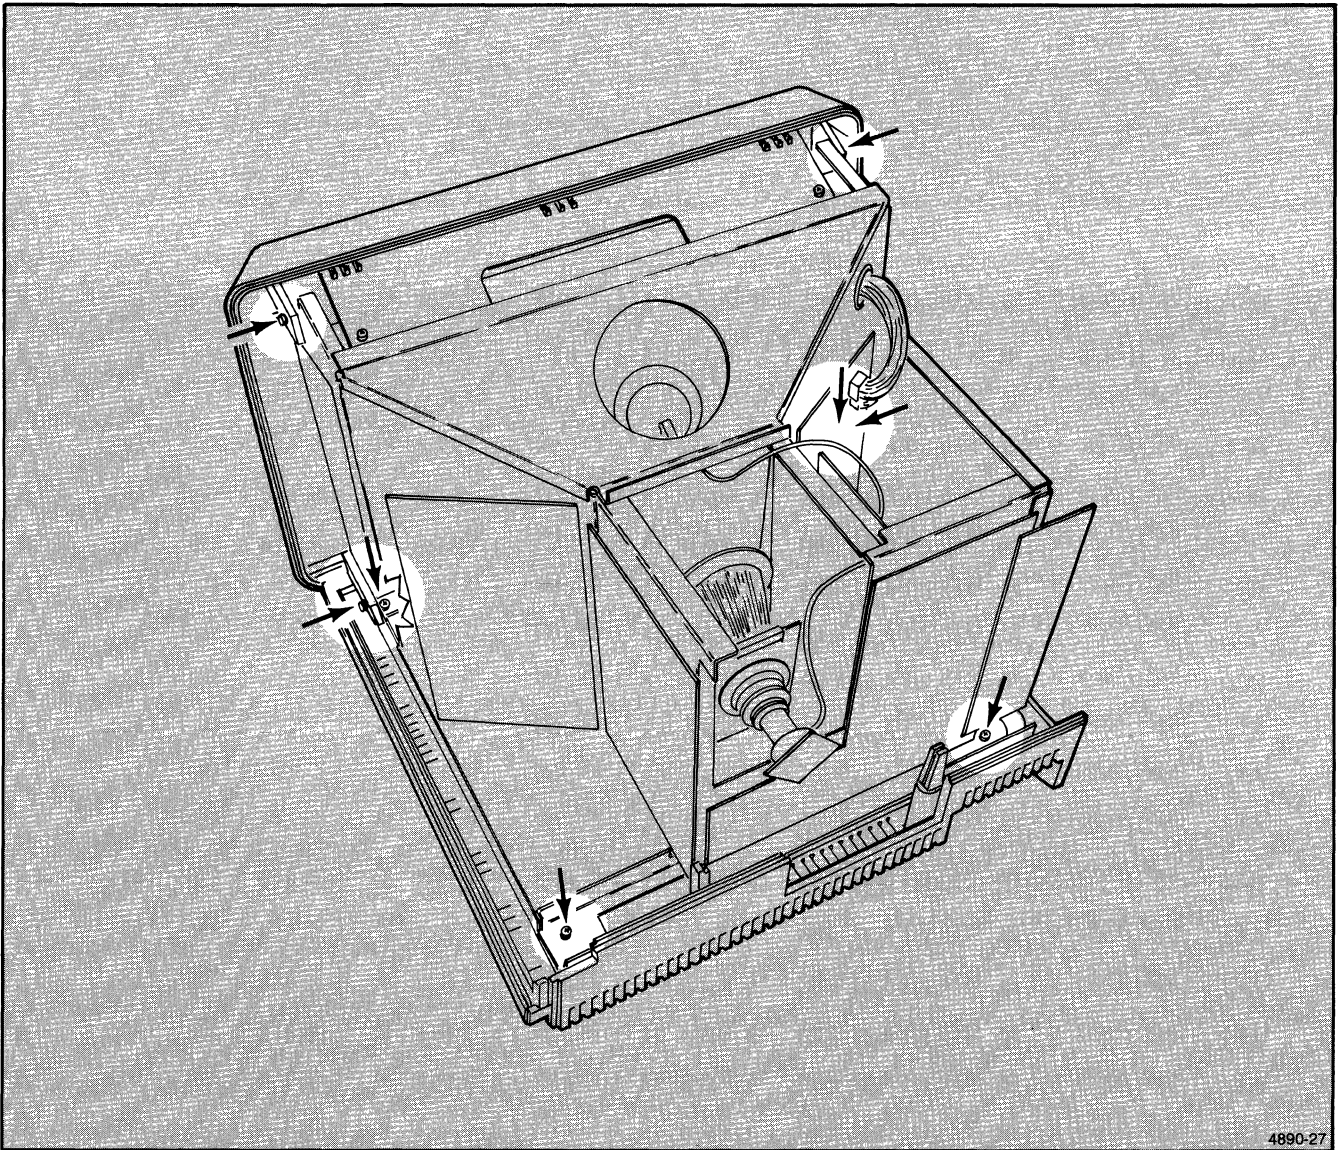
Mounting Screws for the Front Bezel and Display Module.
